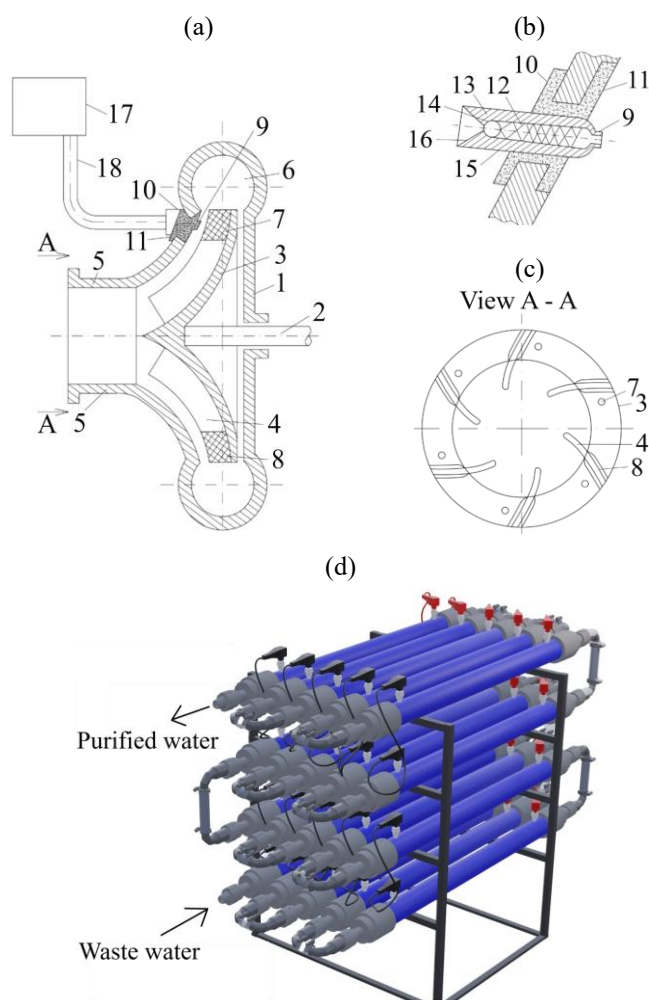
Device for water disinfection using electrical discharges: (a) side section of the device; (b) side section of the stationary electrode; (c) impeller blades with electrodes; (d) general view of the device
